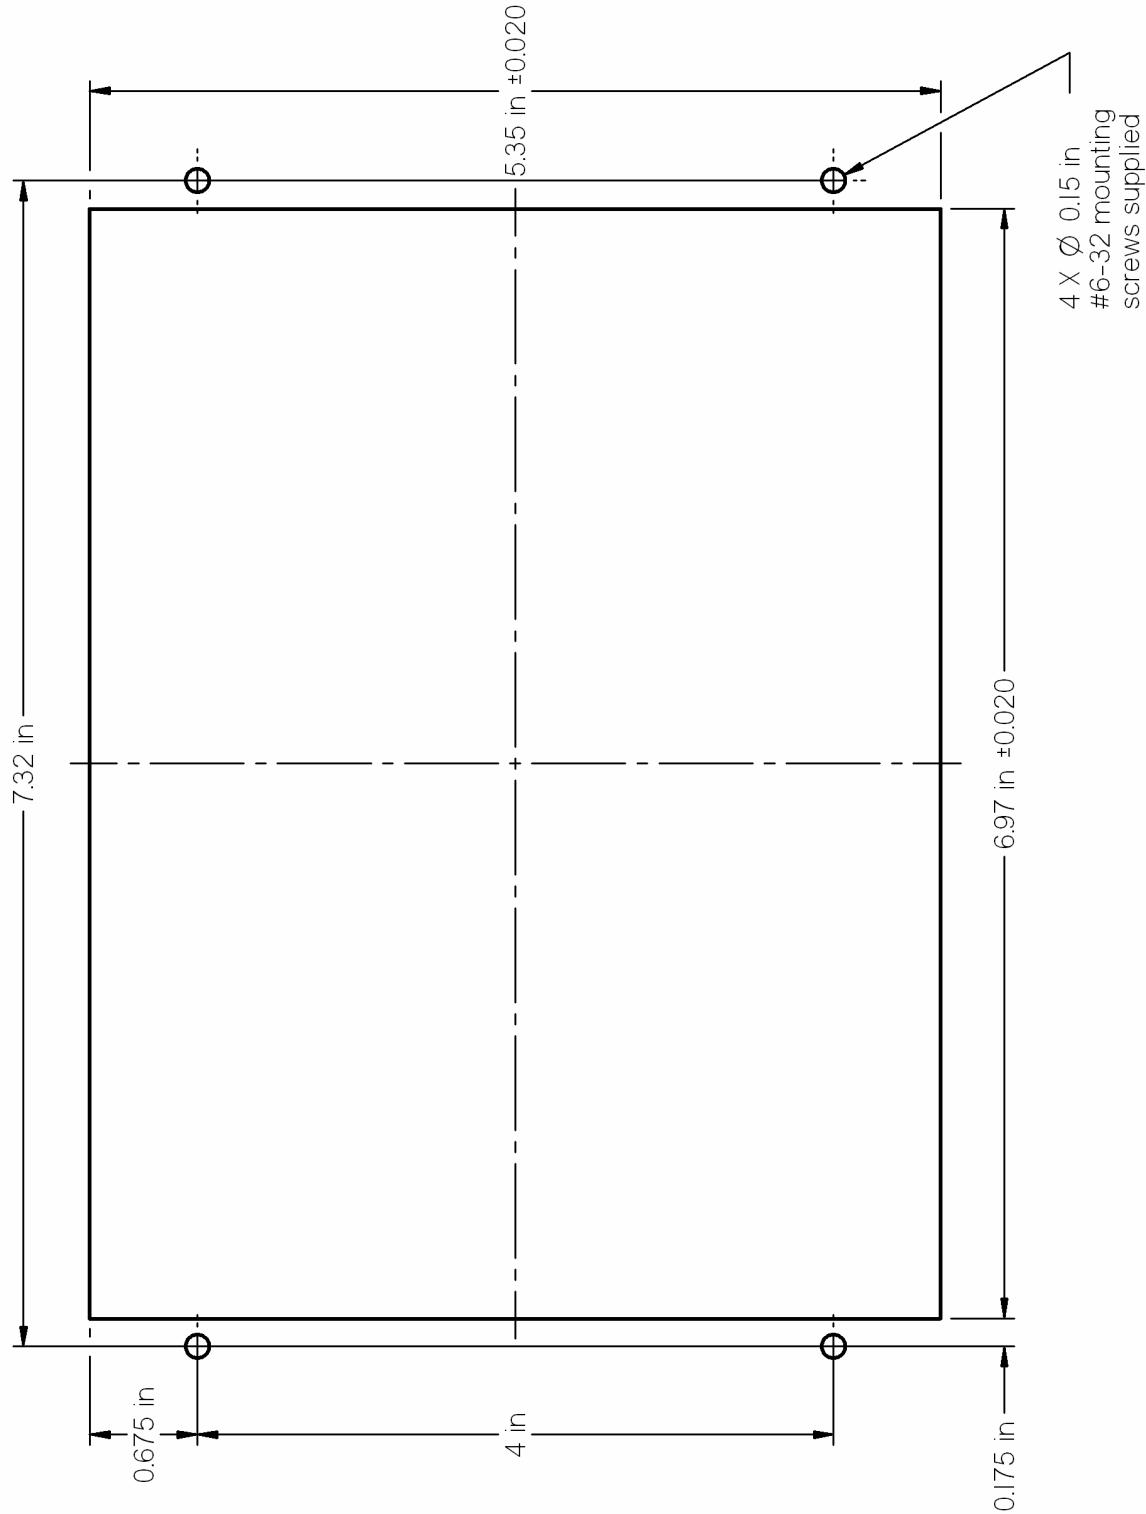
SV-D700 Panel Cutout and Mounting Hole Dimensions - NOT ACTUAL SIZE
